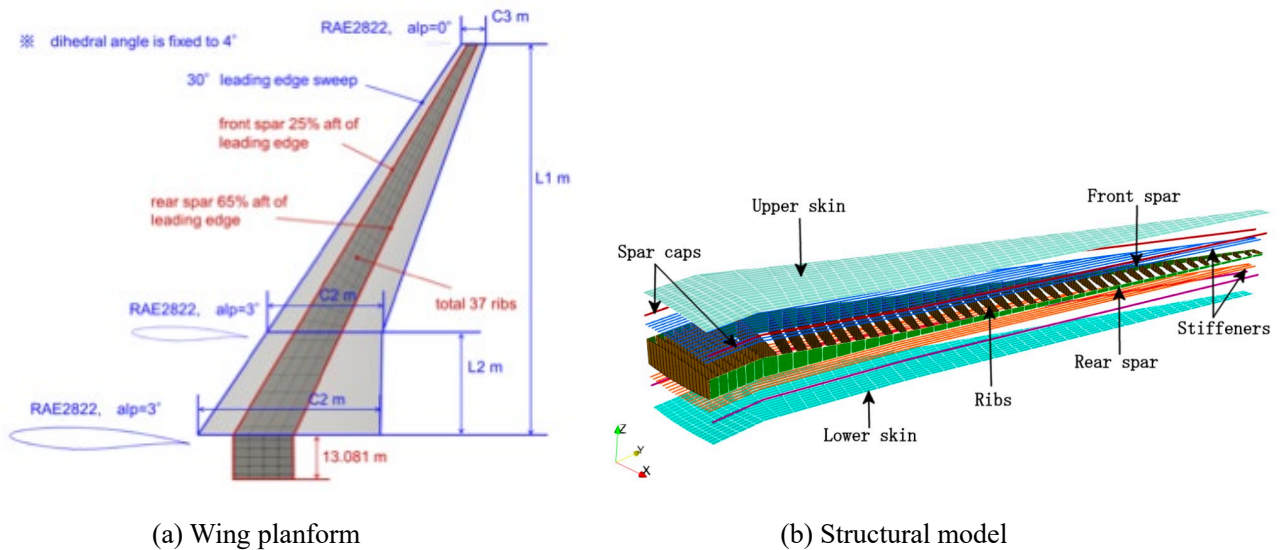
Geometrical specification of wing shape and structural layout.
